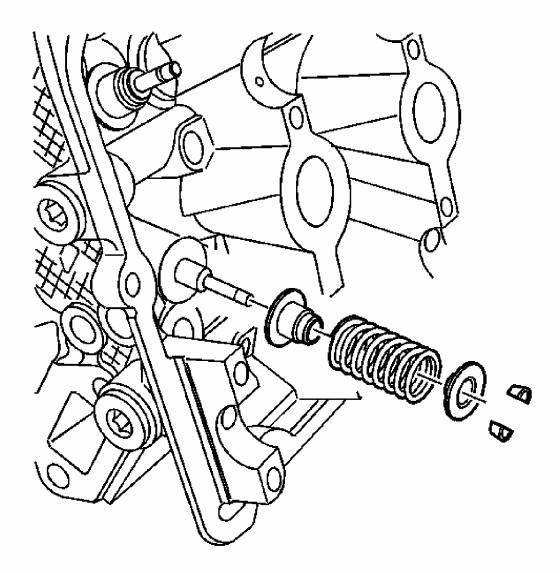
Identifying Valve Spring Components Courtesy of GENERAL MOTORS CORP.
